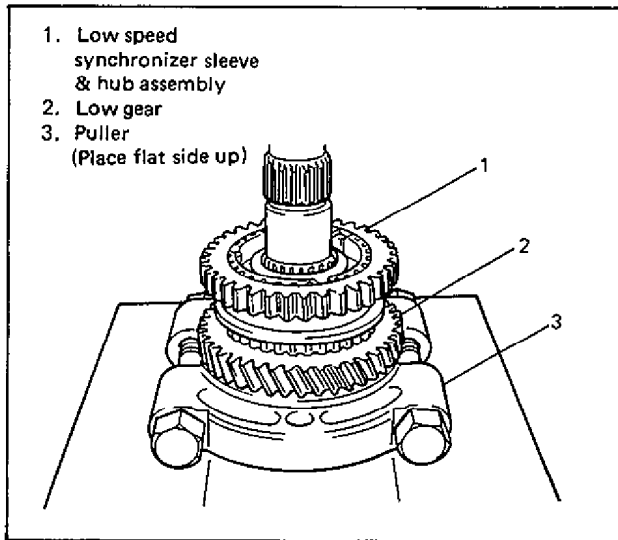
A-50 Removing Low Speed Sleeve & Hub
